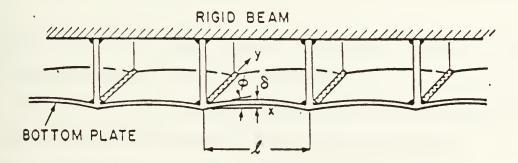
Distortion Due to Fillet Welds [30].
